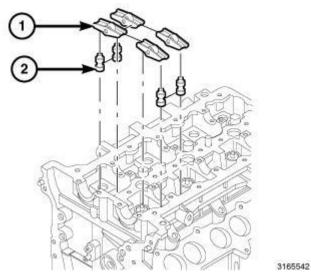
Rocker Arms & Hydraulic Lifters Courtesy of CHRYSLER GROUP, LLC
